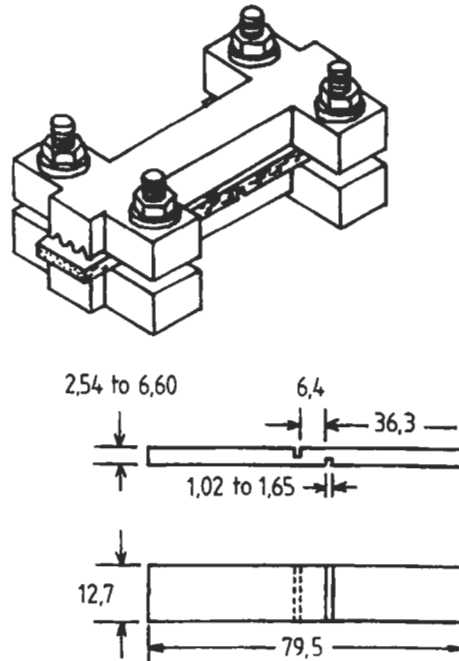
Schematic drawings of specimen and loading jig for in-plane shear test. After ASTM D 3846 (1985).
